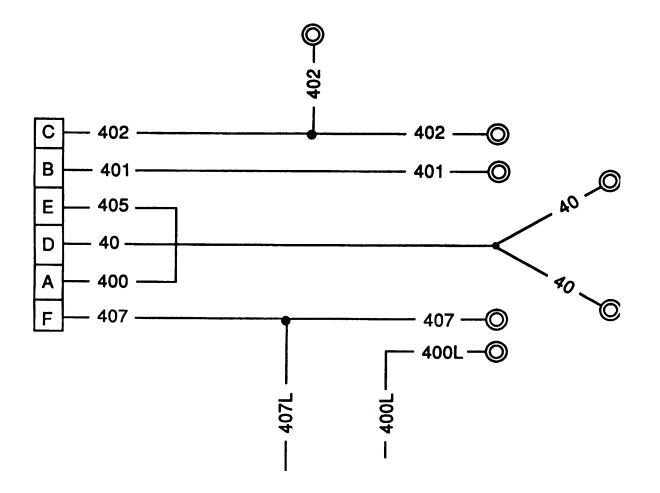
Accessory Control Box Wiring Harness (10925417)
